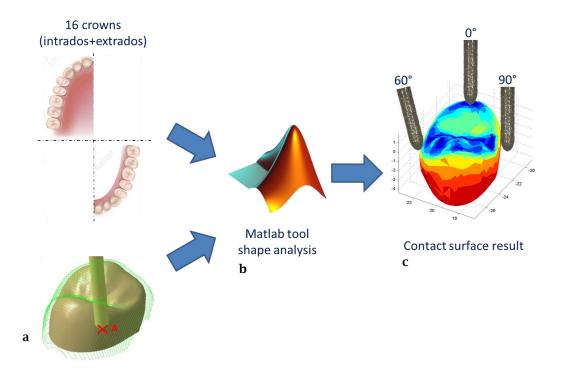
Topological decomposition synopsis. (a) 16 crowns shapes milled. (b) Matlab tool shape analysis. (c) Contact surface results.
